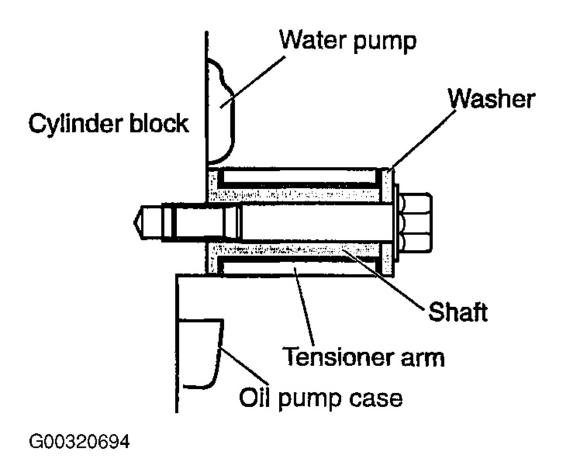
Installing The Tensioner Arm, Shaft And Plain Washer To The Cylinder Block Courtesy of KIA MOTORS AMERICA, INC.
